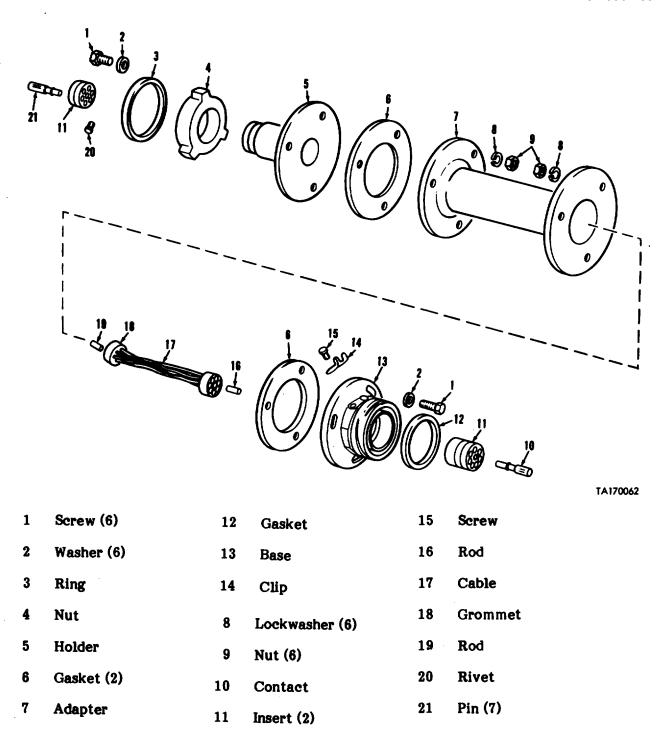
Disassembly or assembly of headlamp adapter (early model bulldozer).
